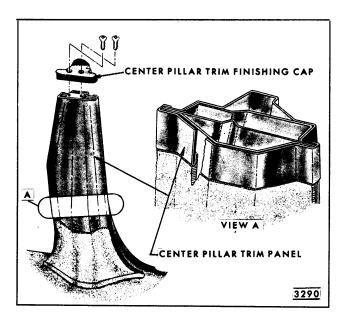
Center Pillar Trim "A-B and C-39, 49" Styles. (26239 Custom, 48439, 682-68349 Styles Shown, Others Similar)
